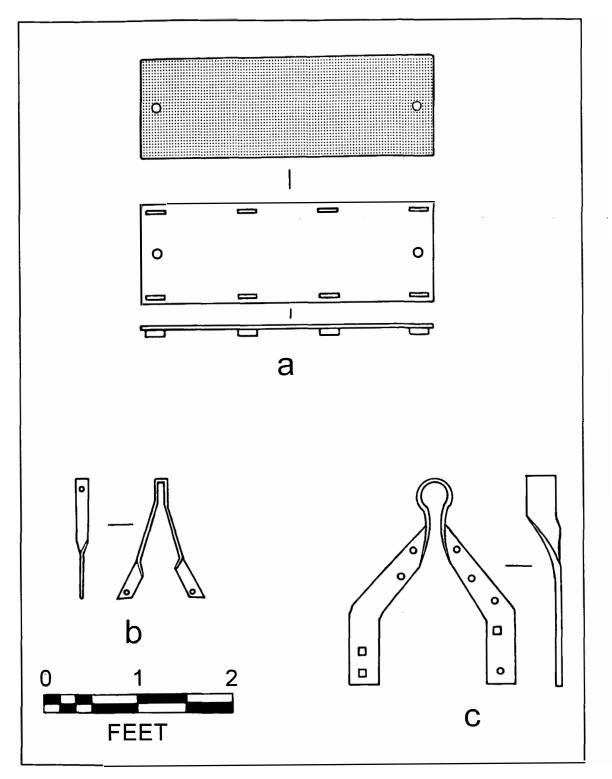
Plan and profile views of flat metal plate (a), "V"-shaped brace (b) and boat davit brace (c). Drawing by Jim Bradford.
